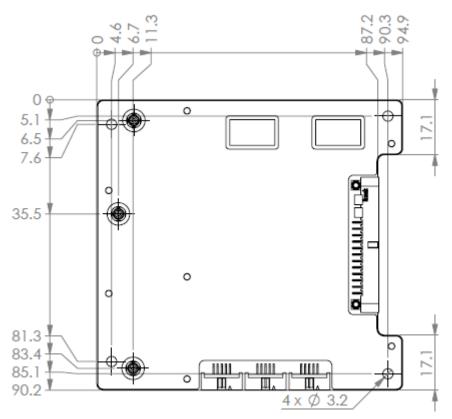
Mechanical Drawing of NANOlink-base - Top view
